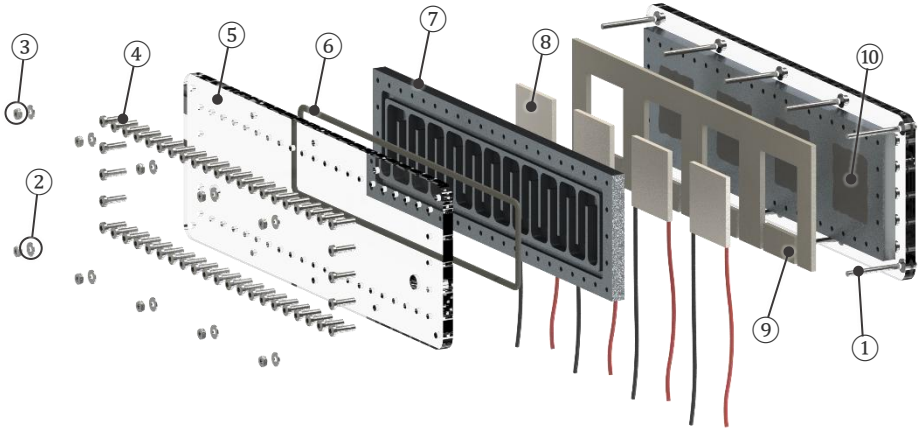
Rendered view of the TE-HX, showing the four Peltier cells, machined aluminium plates, lids, and fixtures.
